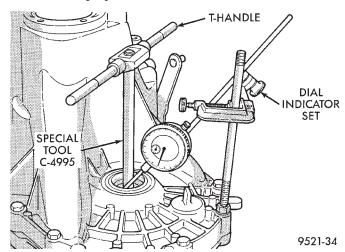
Checking Differential Bearing End Play to Determine Shim Thickness
